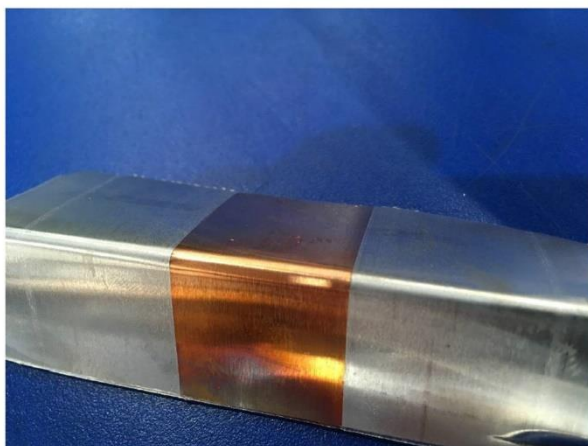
Example of a bend testing coupon of a bi-metallic sample showing a copper inlay within aluminium.
